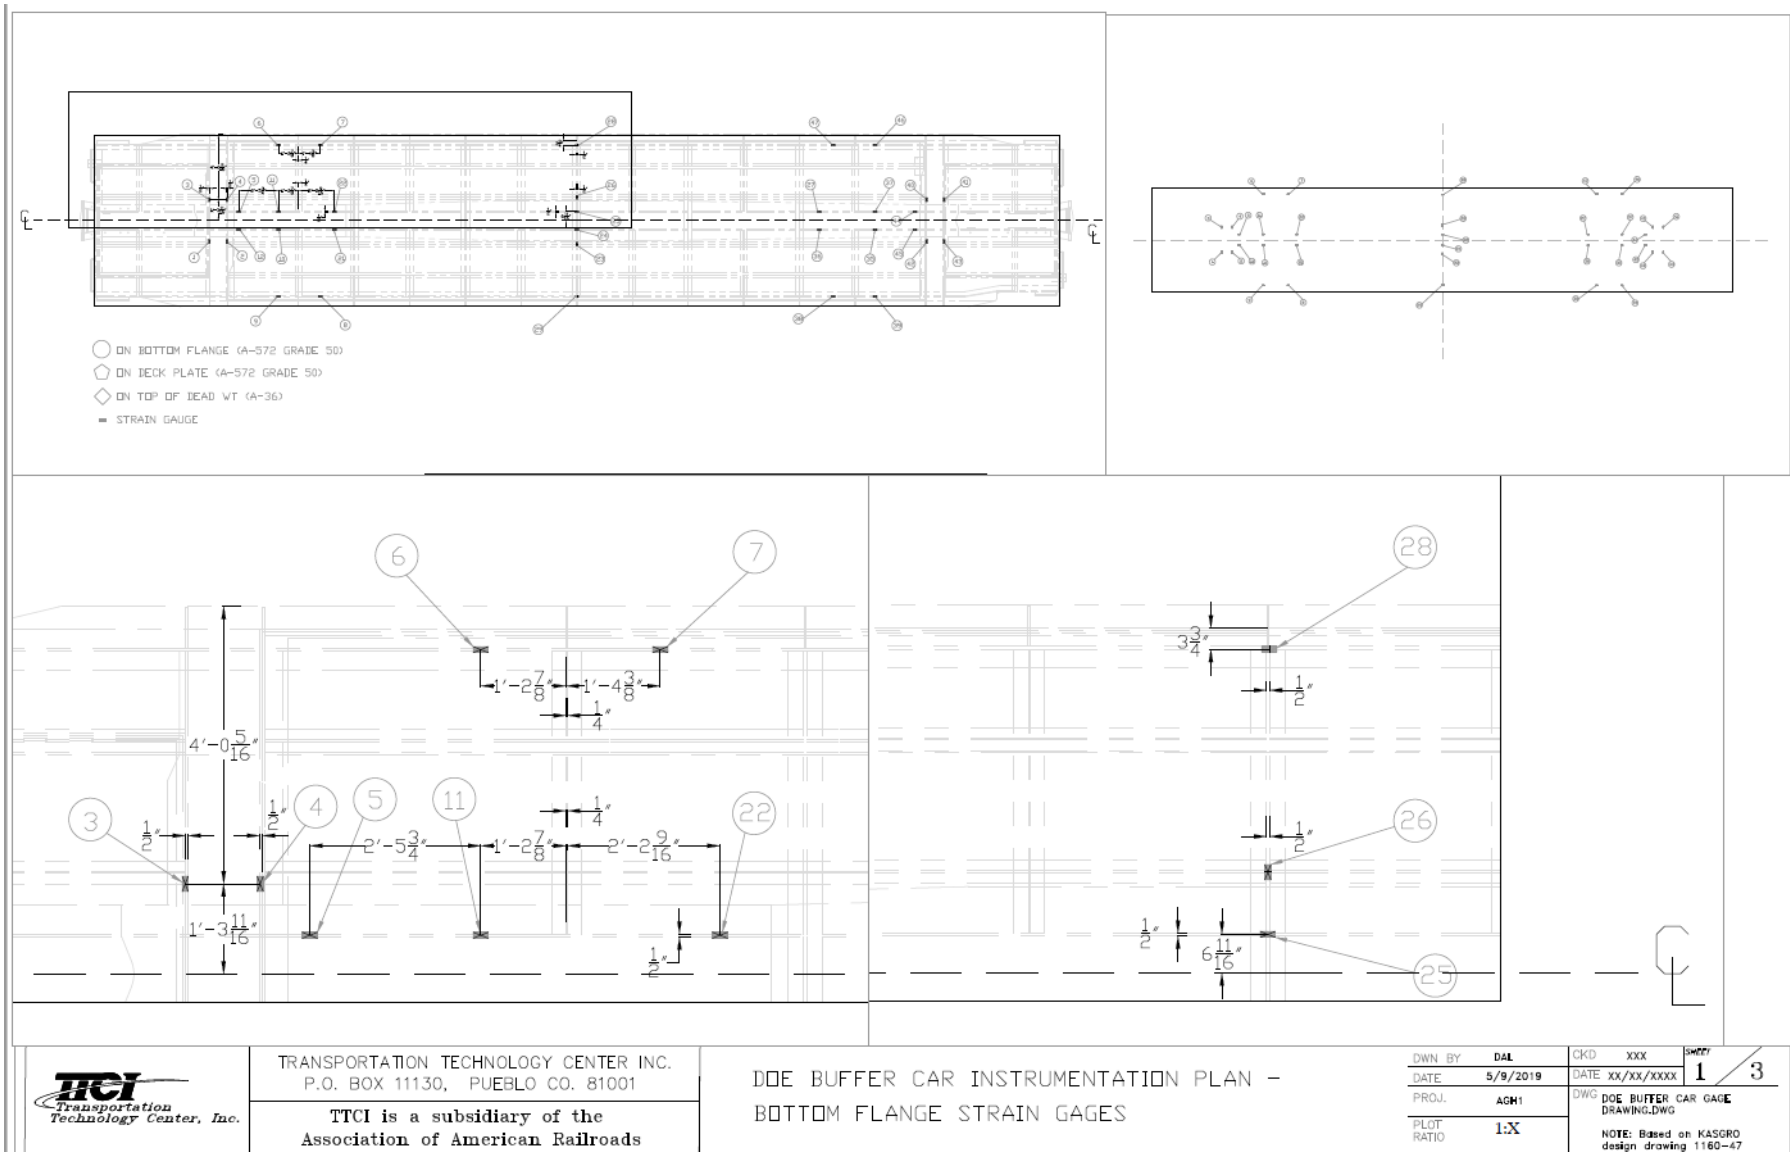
Detailed Strain Gage Locations, on Bottom Flange
